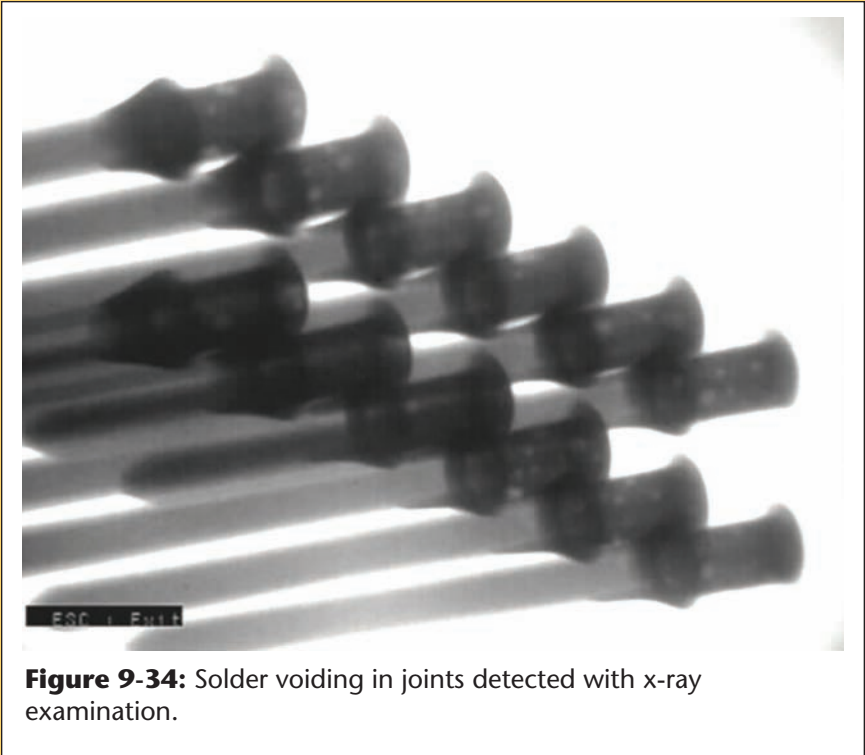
Solder voiding in joints detected with x-ray examination.
